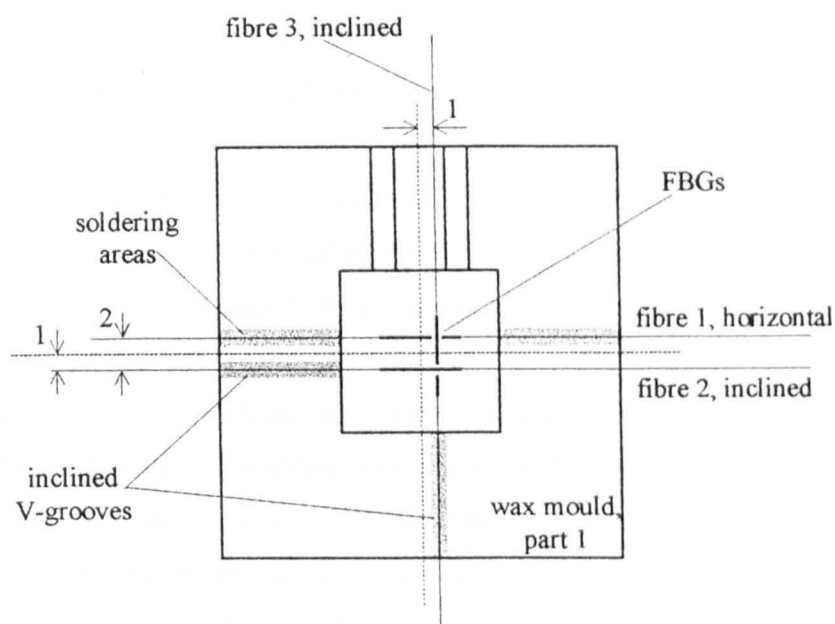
Fibre orientation and soldering areas on the wax mould (dimensions in mm, scale 2:1).
